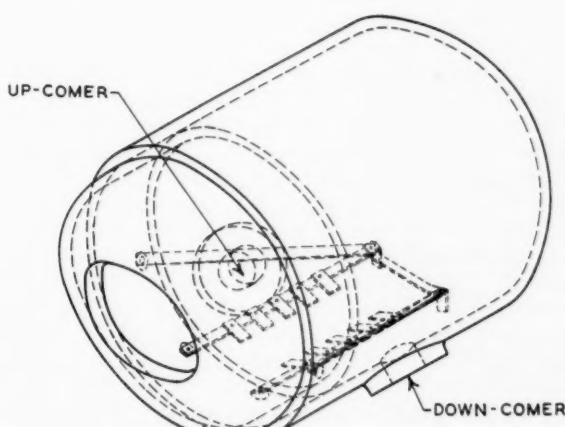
Arrangement of corrosion specimens within the boiler drum
